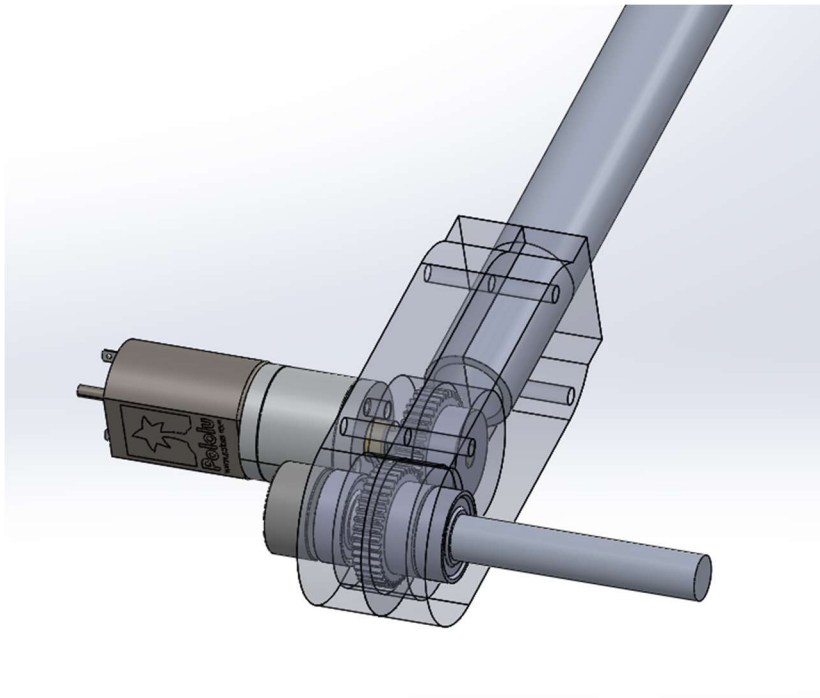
A view inside the micro rover’s motor mount CAD with its gearbox attached to the motor.
